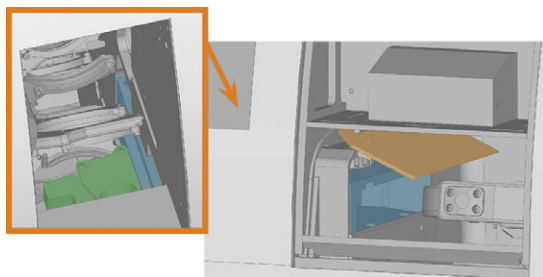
BLANK CHANGER FLAP (MARKED ORANGE), BLANK CHANGER CARRIAGE (MARKED BLUE) AND BLANK GRIPPER (MARKED GREEN)
